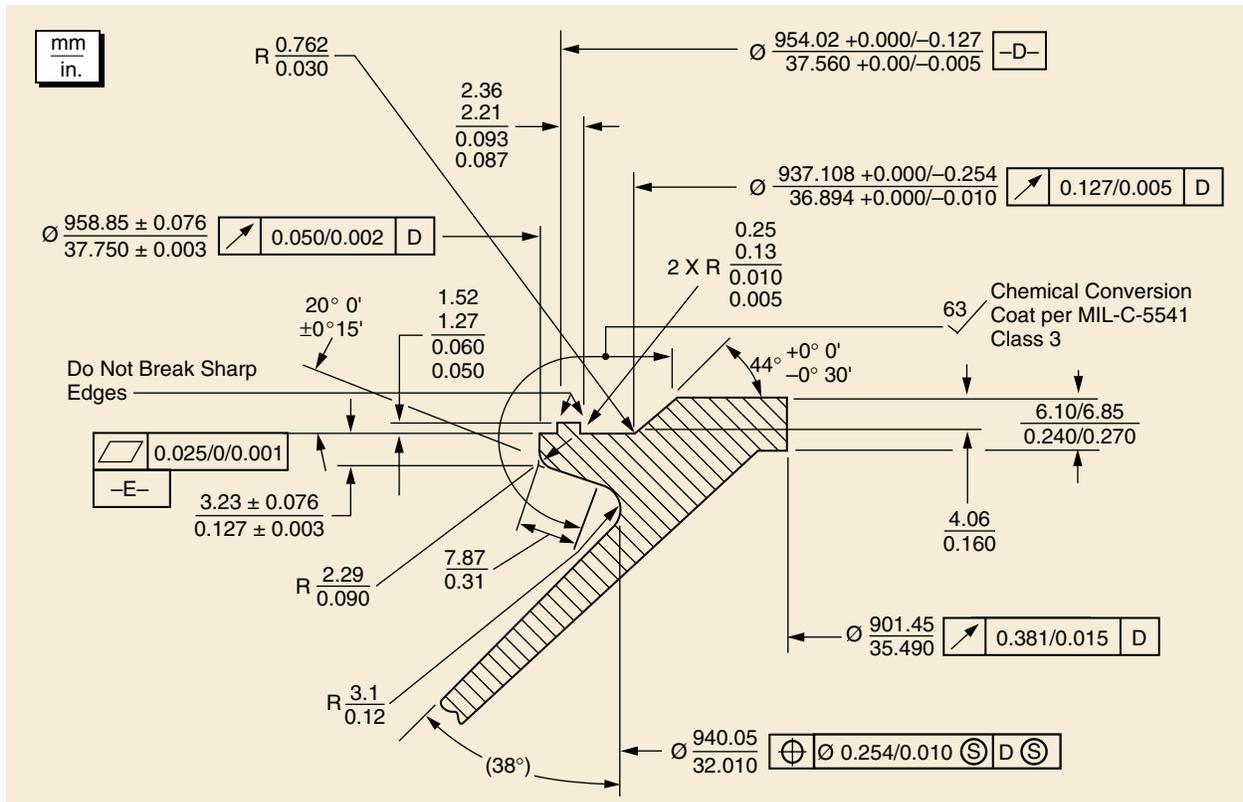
Dual-Payload Attach Fitting 37C PAF Detailed Dimensions
